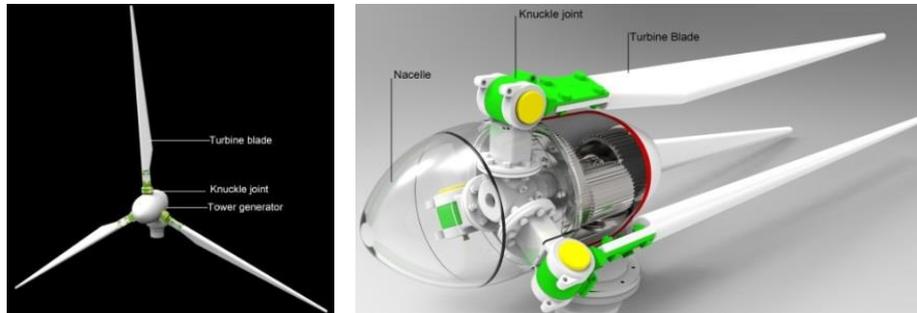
Folded and retracted blades concepts of a mobile horizontal axis wind turbine
